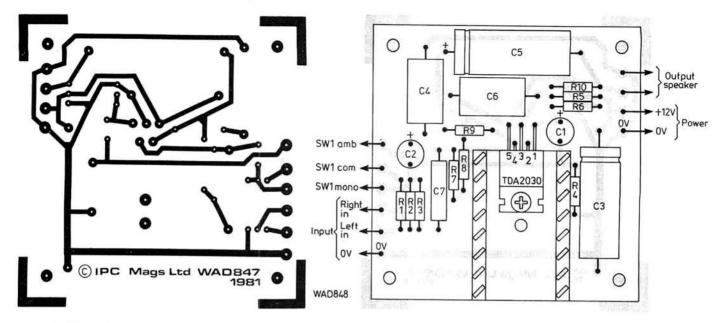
(above): The copper track pattern for the p.c.b. shown full size. Fig. 5 (above right): The component placement drawing for the supplementary car audio amplifier printed circuit board
